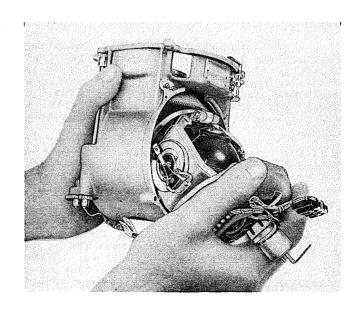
N. Installation of Gyro and Cimbal Assembly. (Attached to Cap and Stator) Into the Frame
